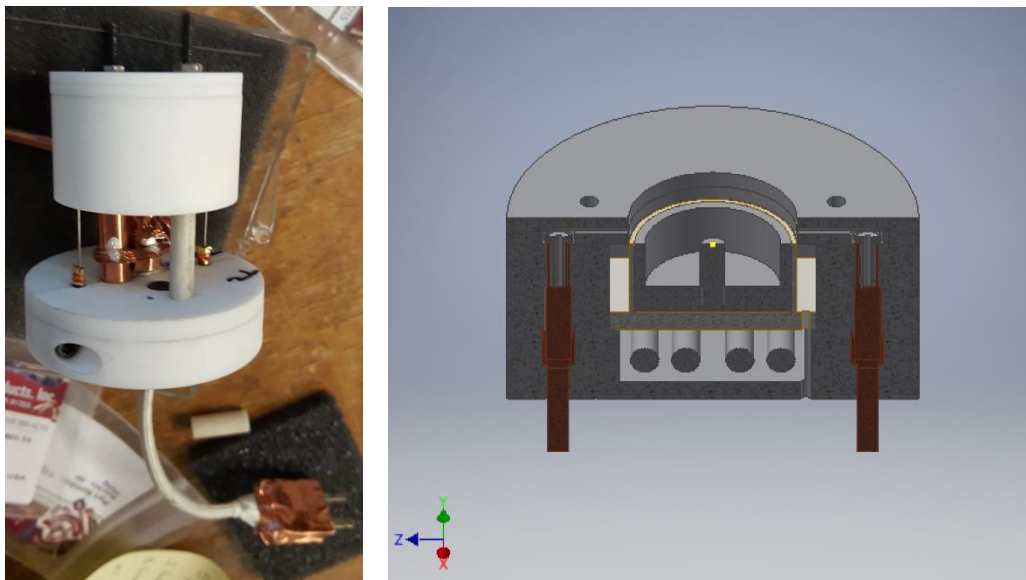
(Left) An image of the fully constructed heater assembly and top quick connect that used the HeatWave Labs Button Heater. (Right) A half-section Inventor view of the upgraded heater assembly (rendered by Cody Moynihan).
